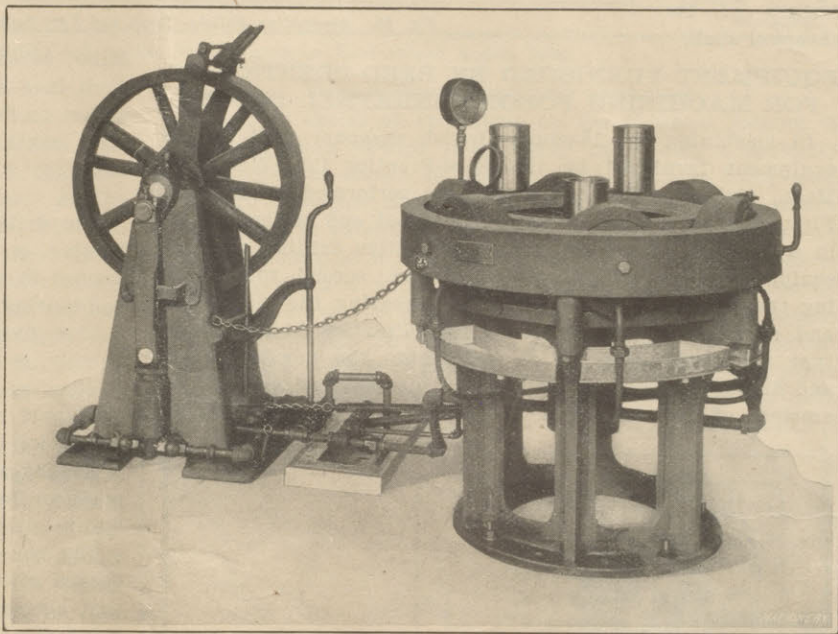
Shrapnel Banding Machine built by the West Tire Setter Co.
